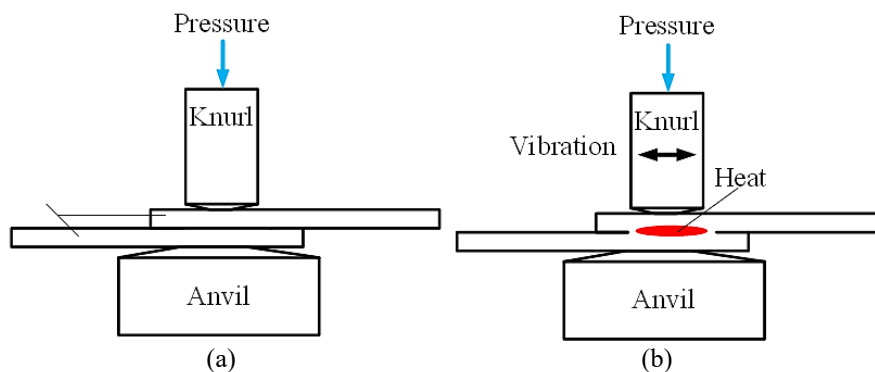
Ultrasonic welding process: (a) clamping and (b) vibration
